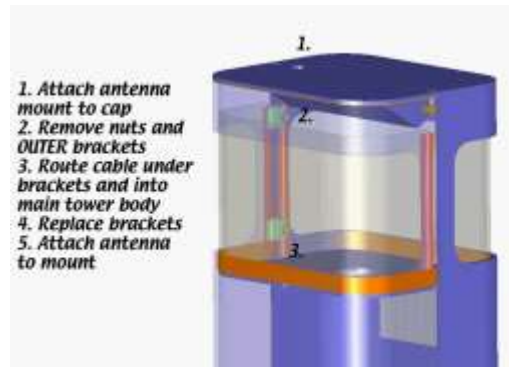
An example of mounting the remote-mounting antenna onto the cap of an ETP-MT/R-OP-PCS tower.
